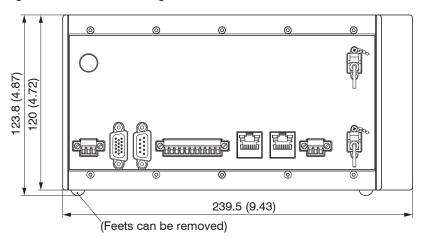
Dimensional drawing controller IFC2422/2466, dimensions in mm
